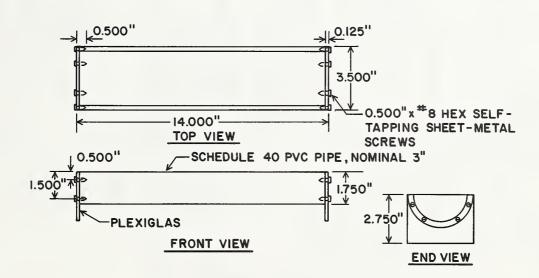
Details of water tray used for wetting bottom of bandoleer strips after they have been formed.
